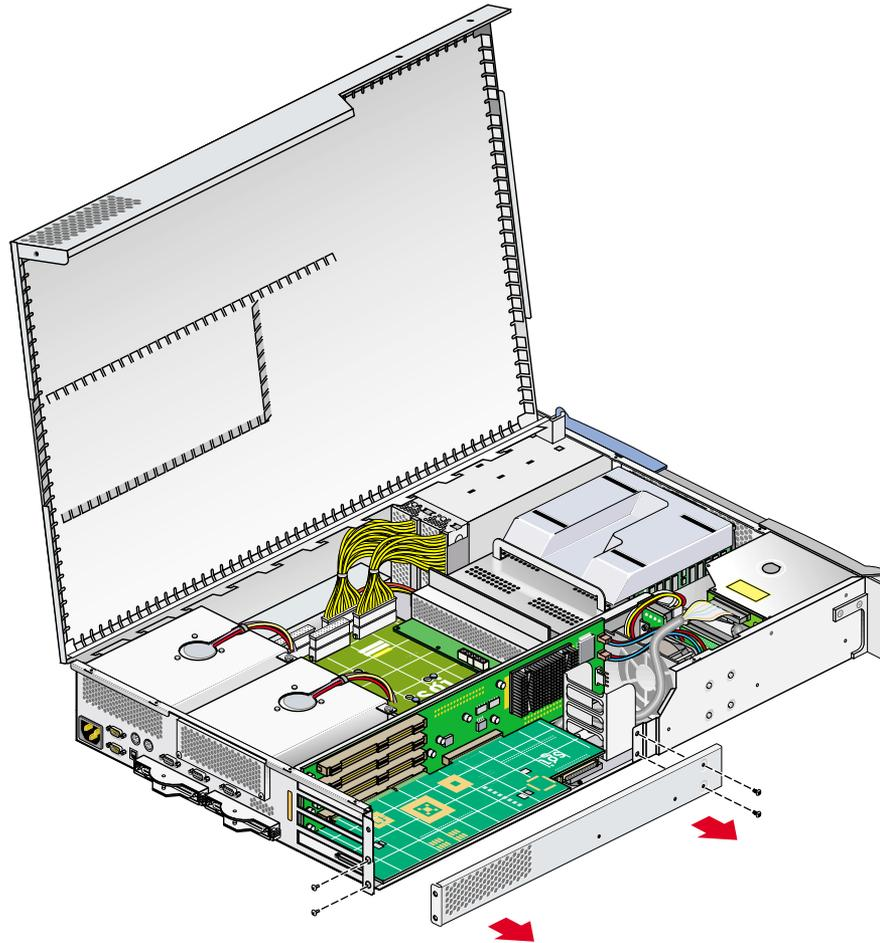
Removing the Lower PCI/PCI-X Support Bracket
